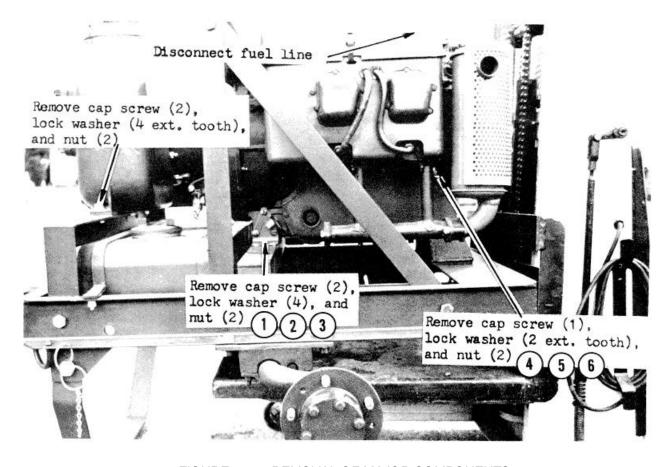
REMOVAL OF MAJOR COMPONENTS
